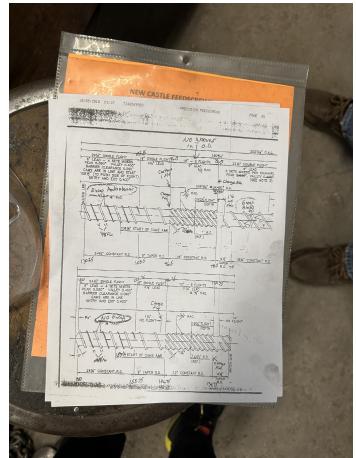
This is the weld sheet that they get to do the weld in spec
